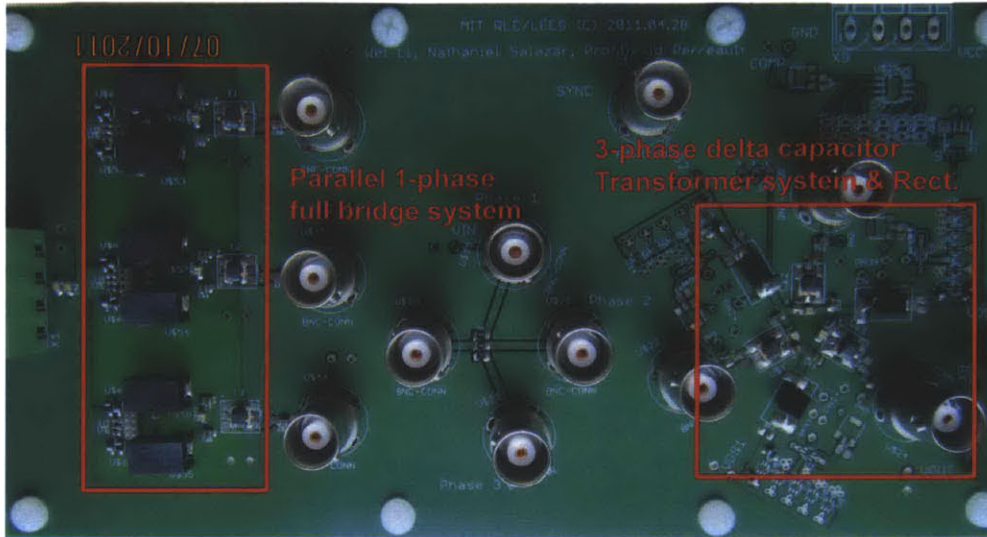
Picture of the polyphase ac power delivery PCB prototype test board.
